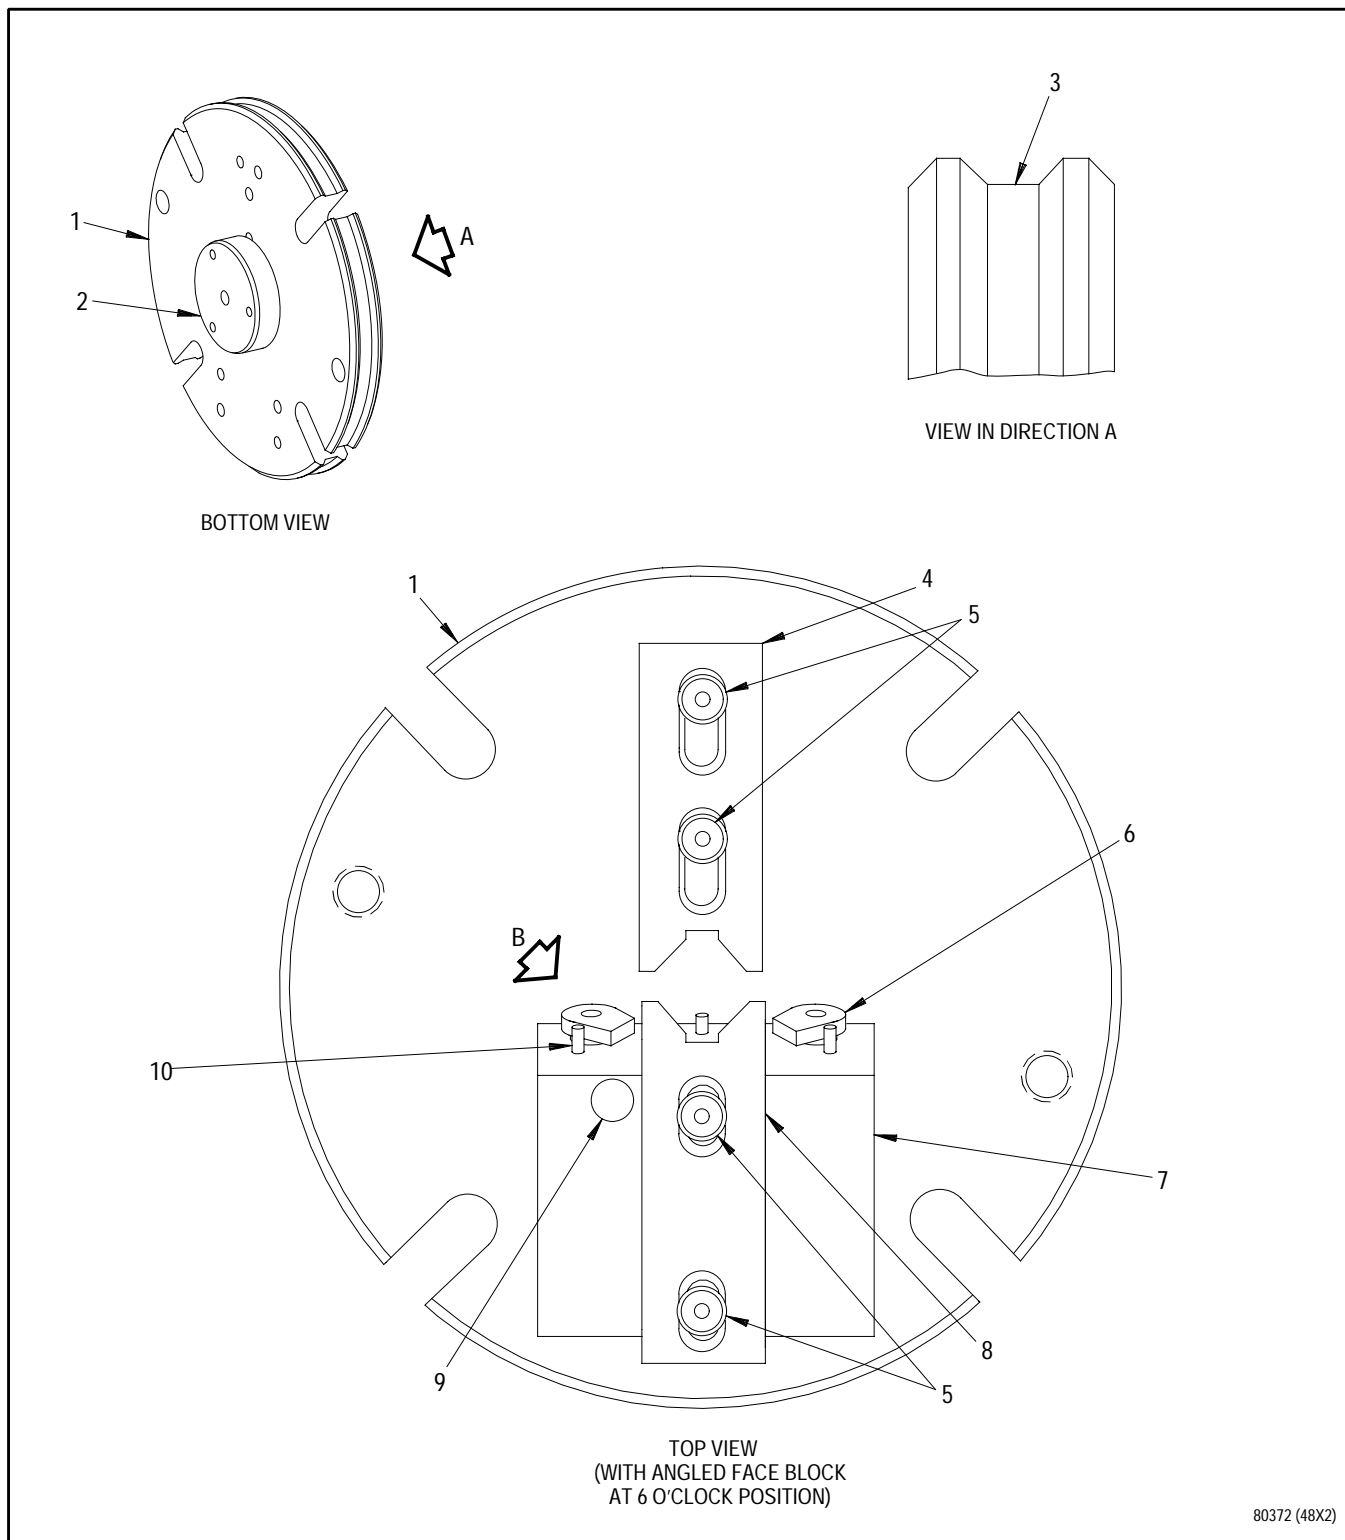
No. 4 Bearing Air Supply Tube Assembly - PWA 71485 Machining Fixture Installation
